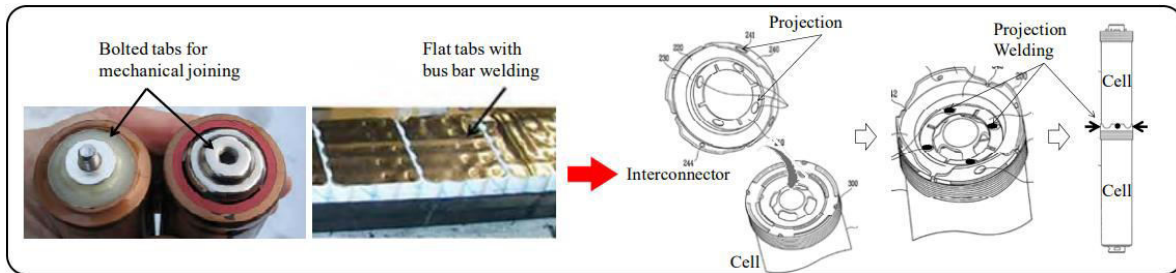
Mechanical joining (Bolted tabbed cells) and Resistance welding (flat tabbed cells) (Lee et al. 2010).
